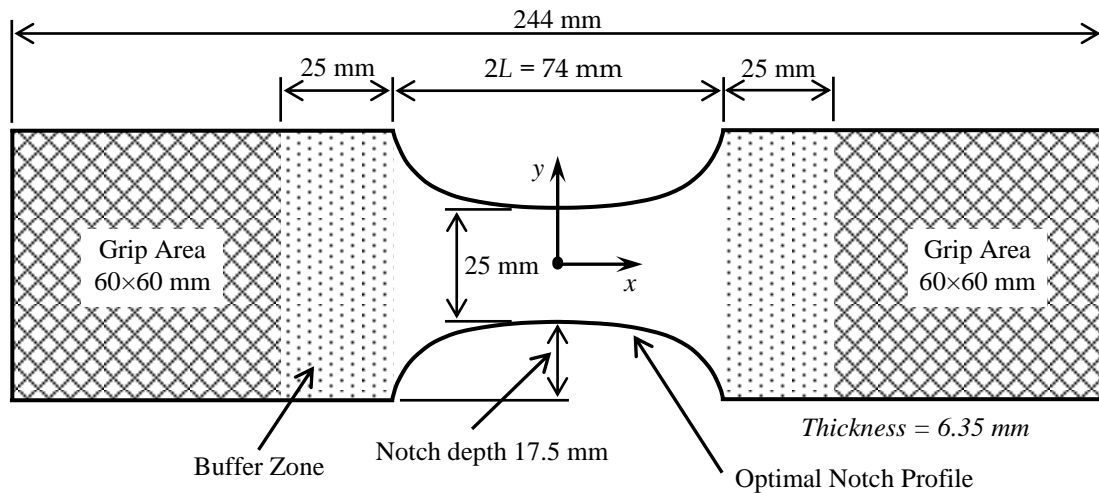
General shape and dimensions of optimised Constant-Stress Coupon.
